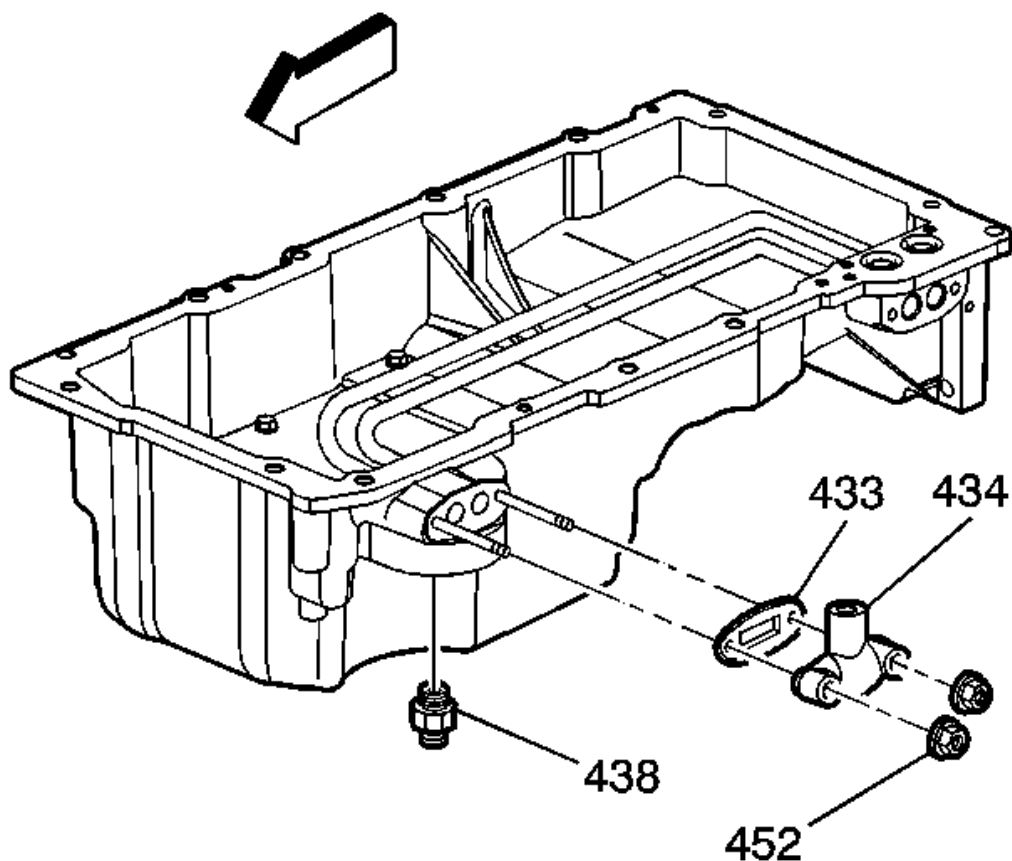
View Of Oil Pan Cover, Gasket & Nuts
